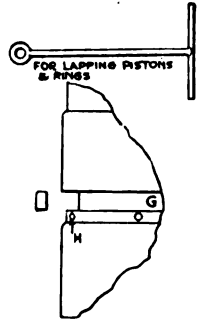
The tool at the top can be used for lapping the pistons and rings. At the bottom is illustrated the proper use of piston and ring to prevent oil going into cylinder
